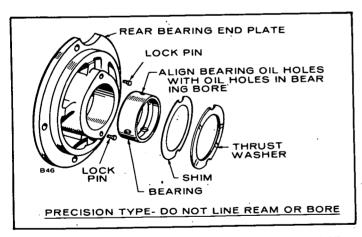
BEARINGS FOR REAR BEARING PLATE
